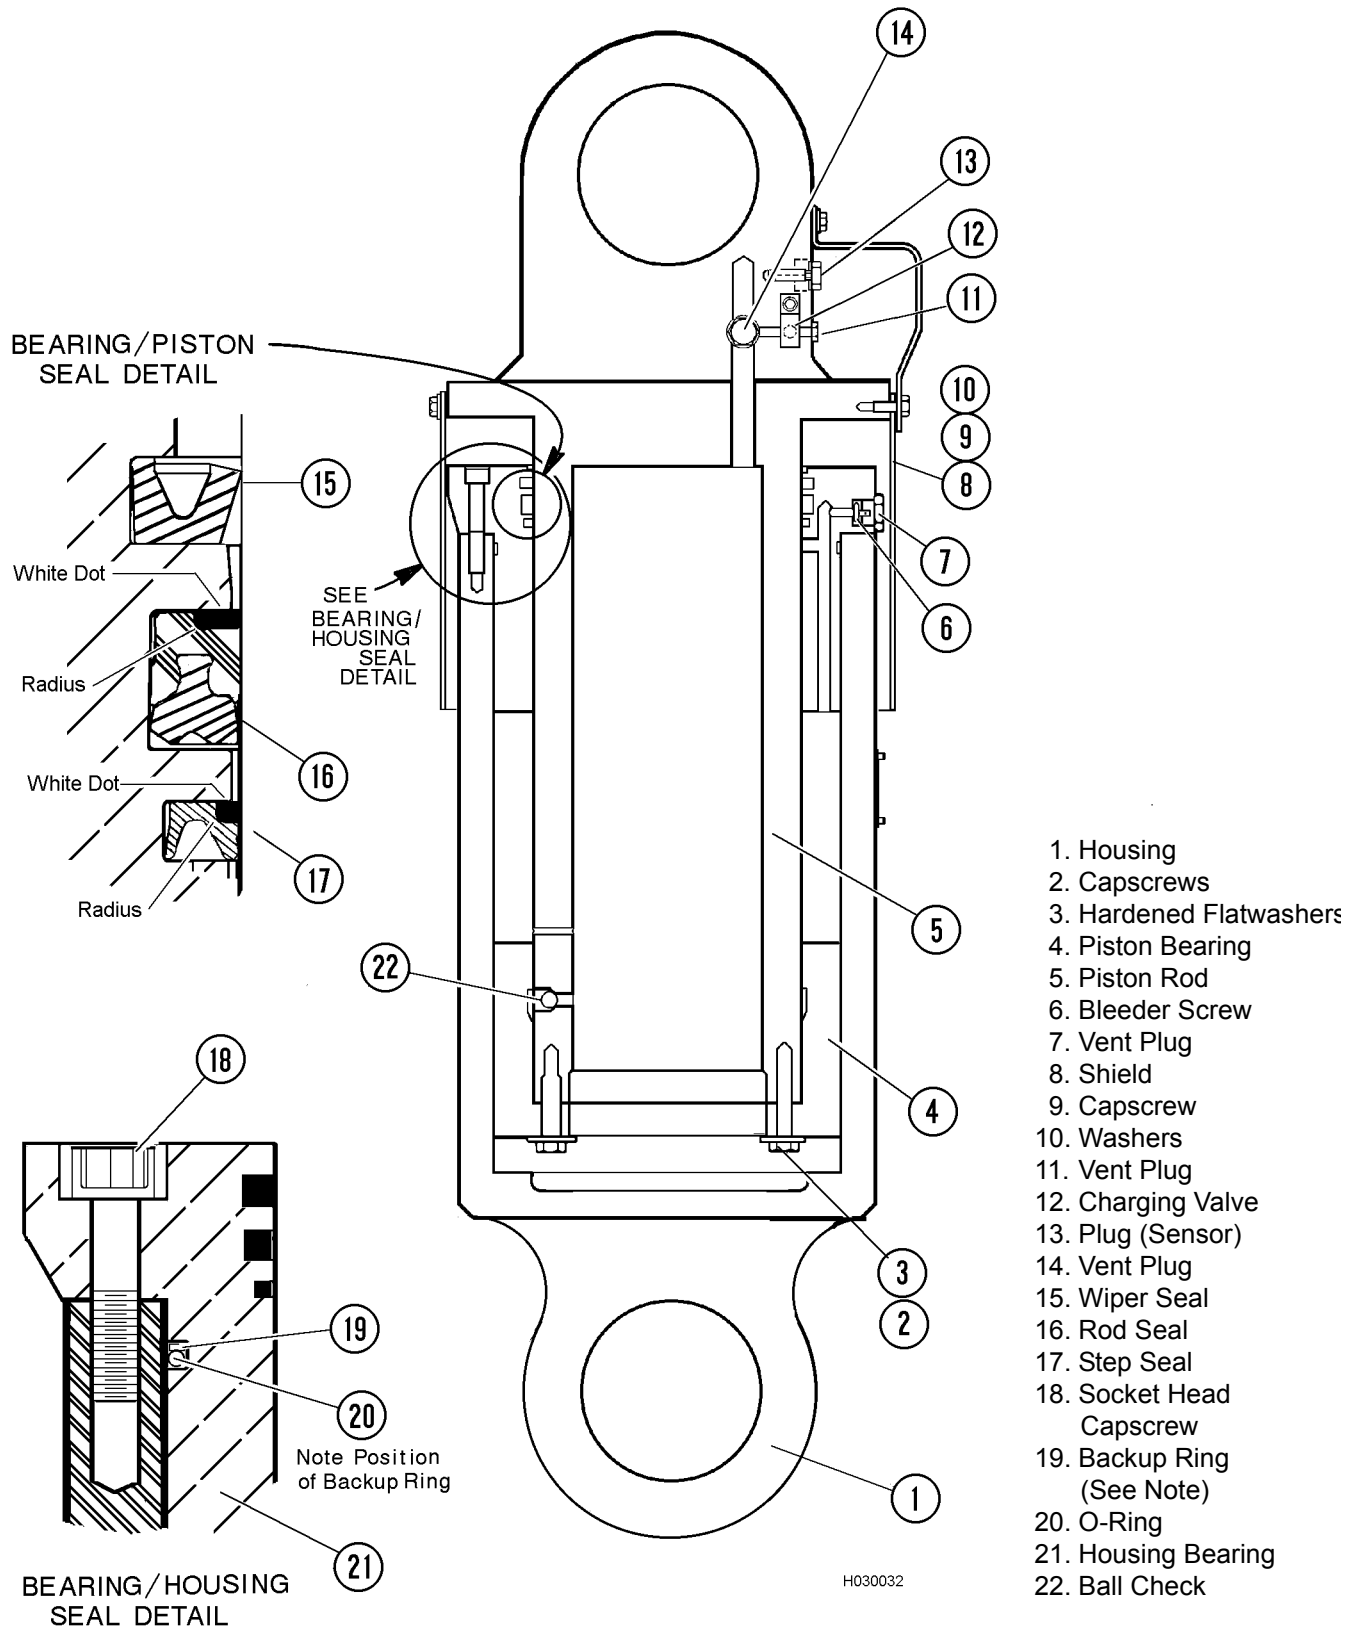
REAR SUSPENSION ASSEMBLY
